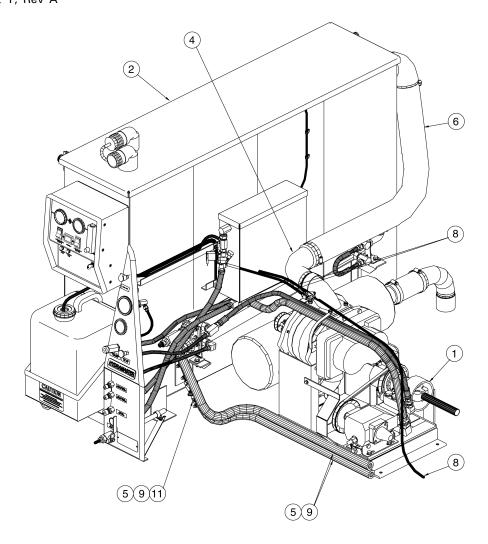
CDS 4.6 Machine Assembly-Rear View D4429 Sht 2, Rev A
